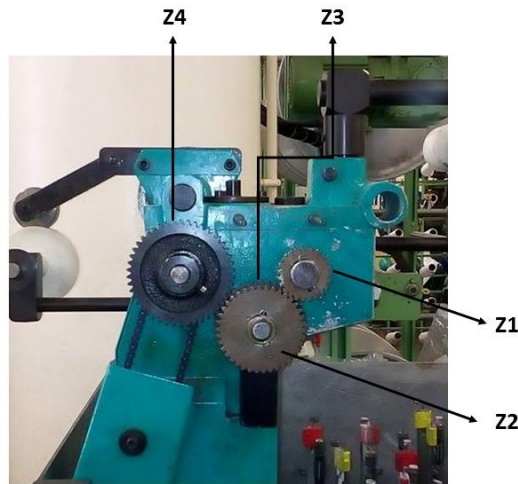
Scheme of work of braiding machine, with four gear wheels.
